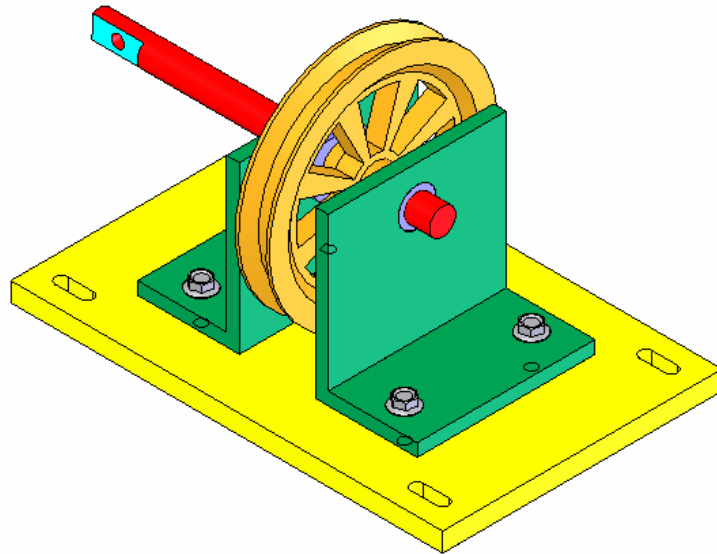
Assembly used for design project in Spring 2006 and Spring 2007. Courtesy of Dr. Richard Martin, PhD, PE, Aztec Engineering.
